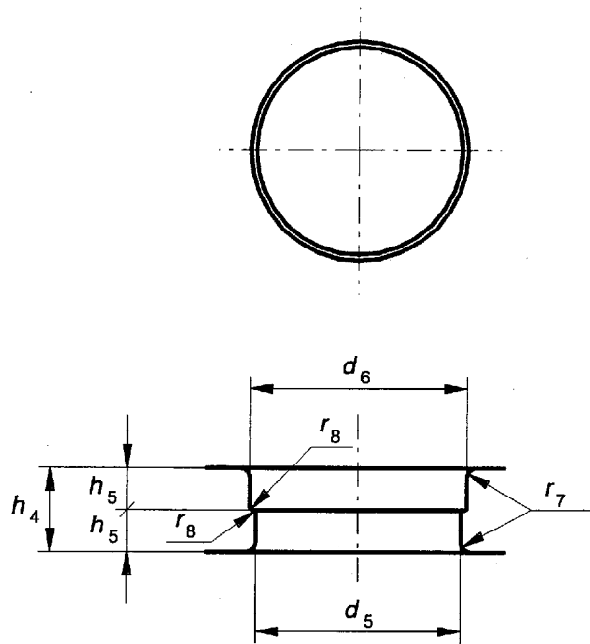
Dimensions of GO and NOT GO gauges for ball couplings
